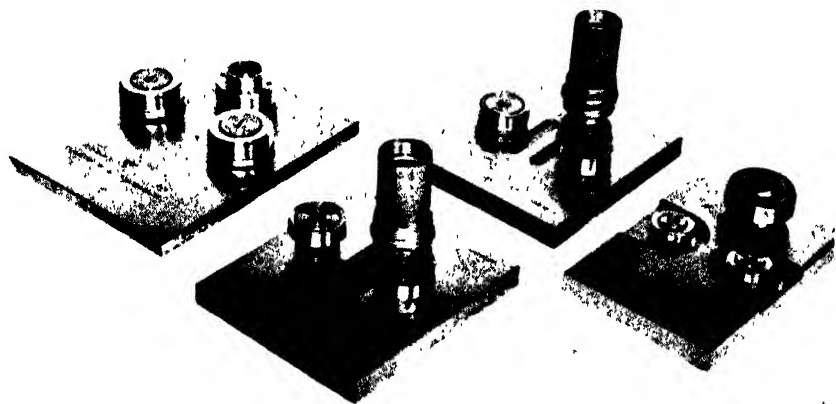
Some roller-type screw-gauges and the parts they gauge.
